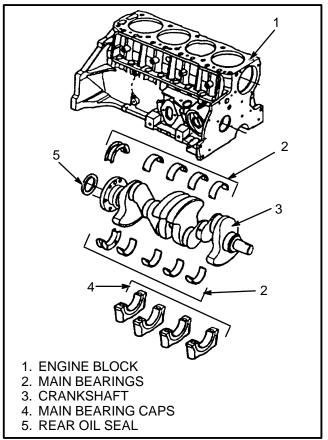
GM 3.0L, CRANKSHAFT, MAIN BEARINGS, AND OIL SEAL
